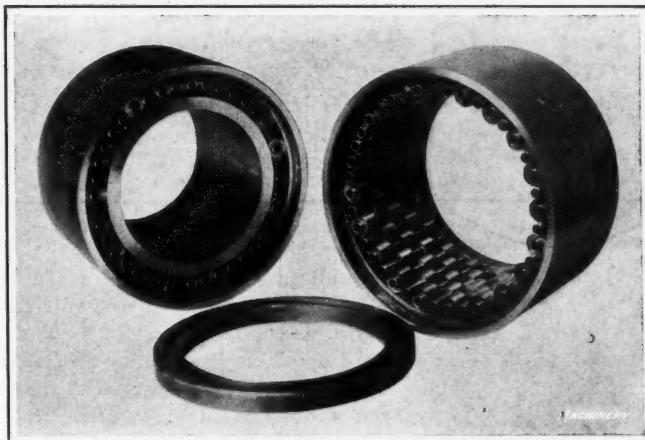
Radial Roller Bearing with Staggered Rollers which reduce Angularity
